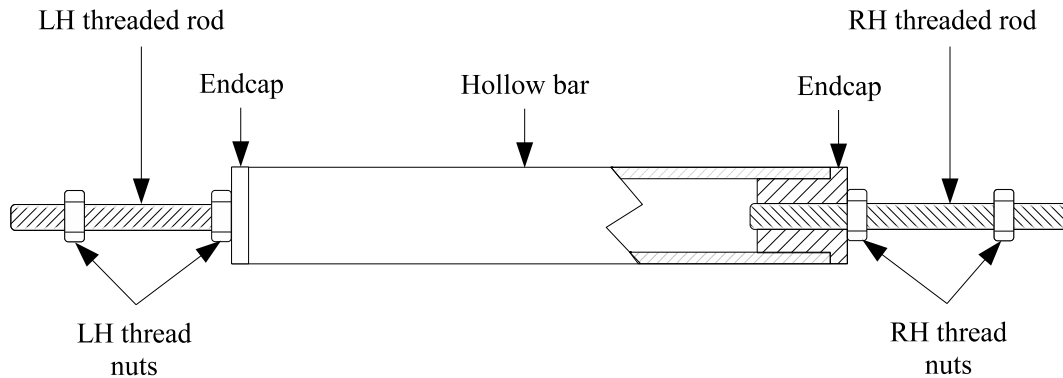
Strut assembly showing hollow bar, end caps and threaded rods with locking nuts
